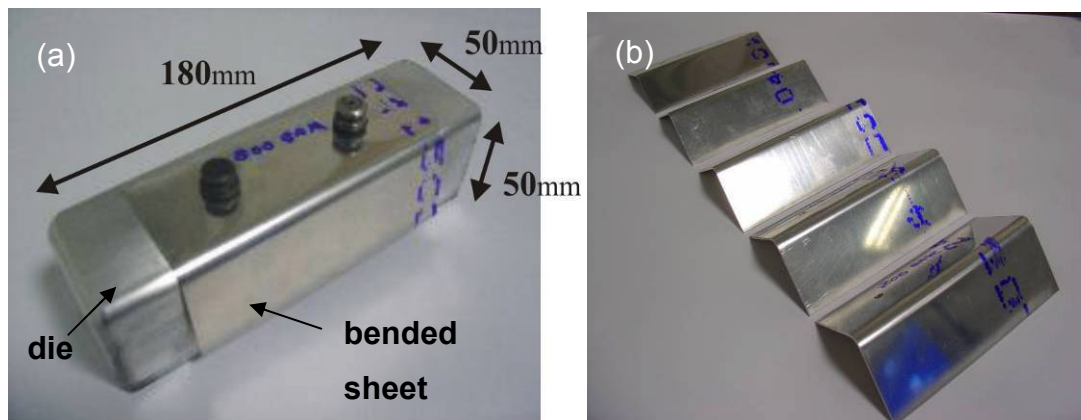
Straight Flange Bending Specimen: (a) The die and the bended sheet
